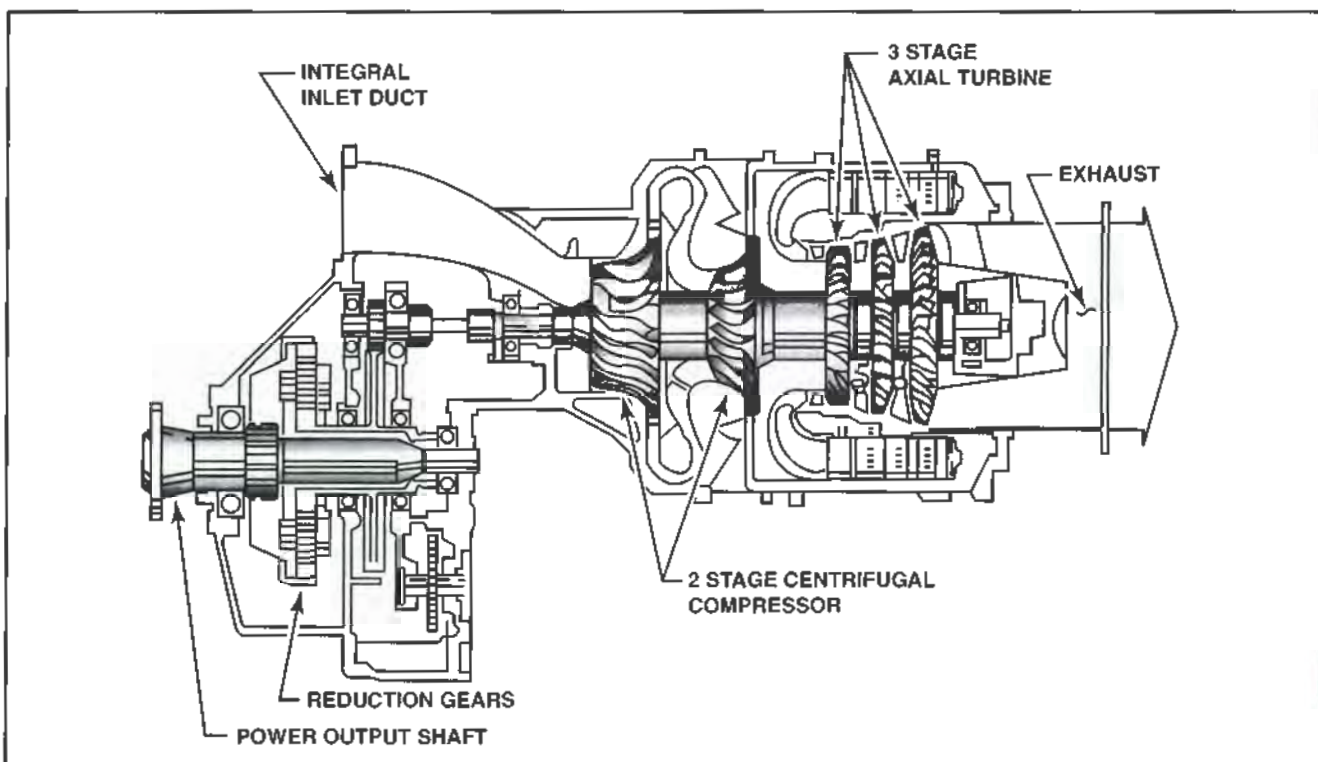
The Allied Signal TPE-331 is a fixed-shaft turbine engine with a two-stage centrifugal compressor and a three-stage axial turbine.
